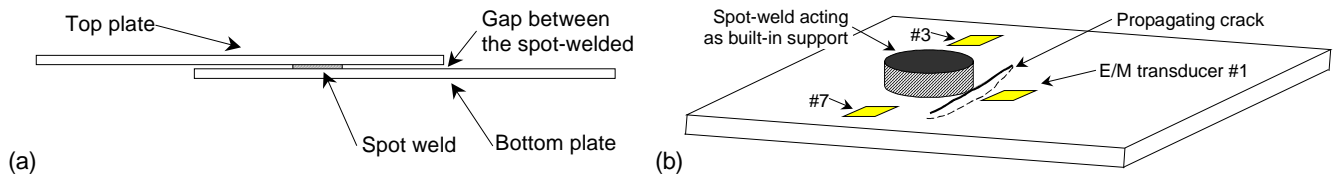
Details of the spot-welded lap-shear tension specimen: (a) Side view of a spot-welded lap-shear specimen featuring the top and bottom plates, the spot weld, and the gap between the plates. (b) Representation of the bottom plate of the spot-welded lap-shear specimen with a crack propagation close to the spot weld. The plate boundary conditions are radically changed as the crack propagates.
